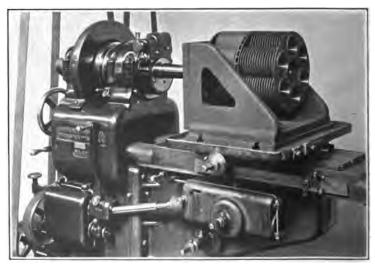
Cylinder grinding machine. (Courtesy Heald Machine Co.)
